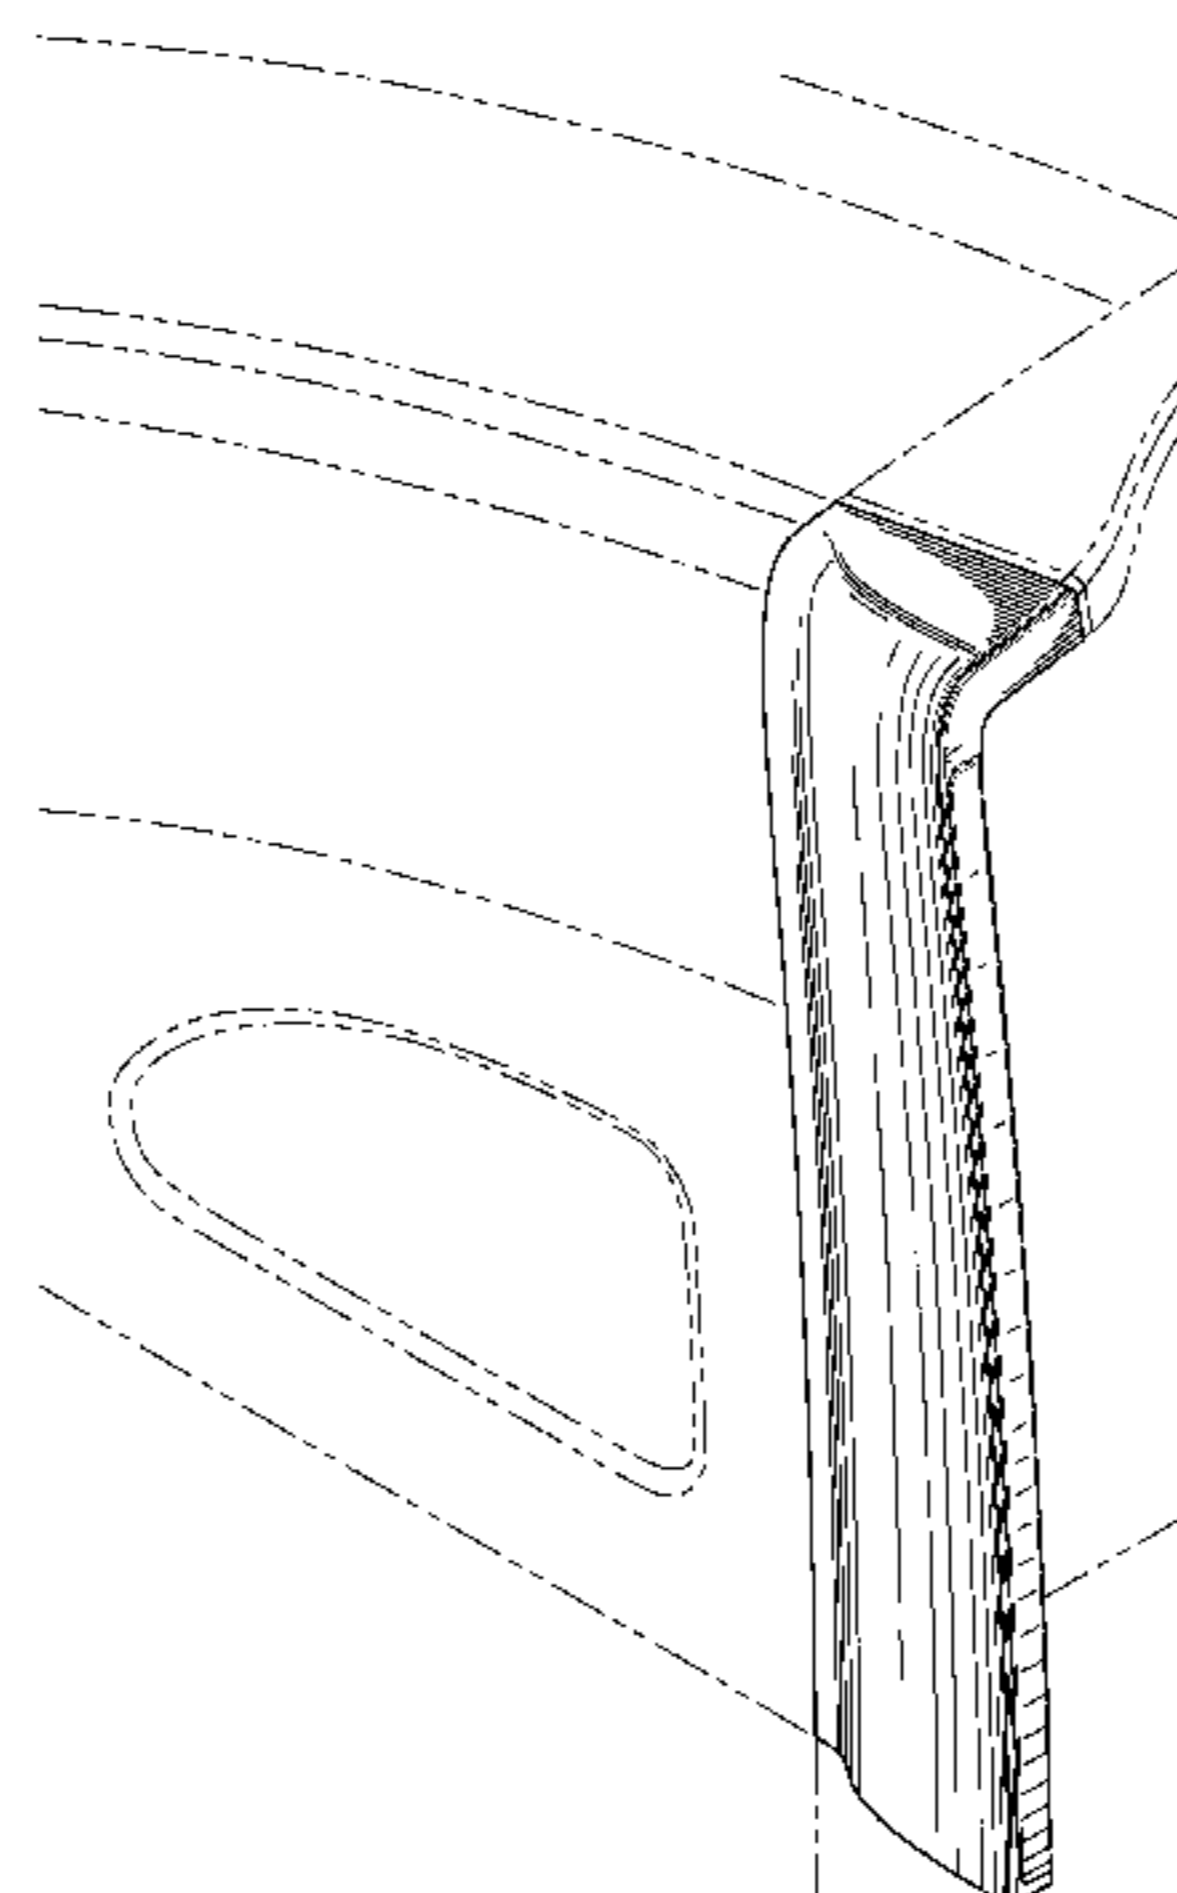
is a left side elevational view of the extender for sidewall of truck roof of FIG. 1; and,
